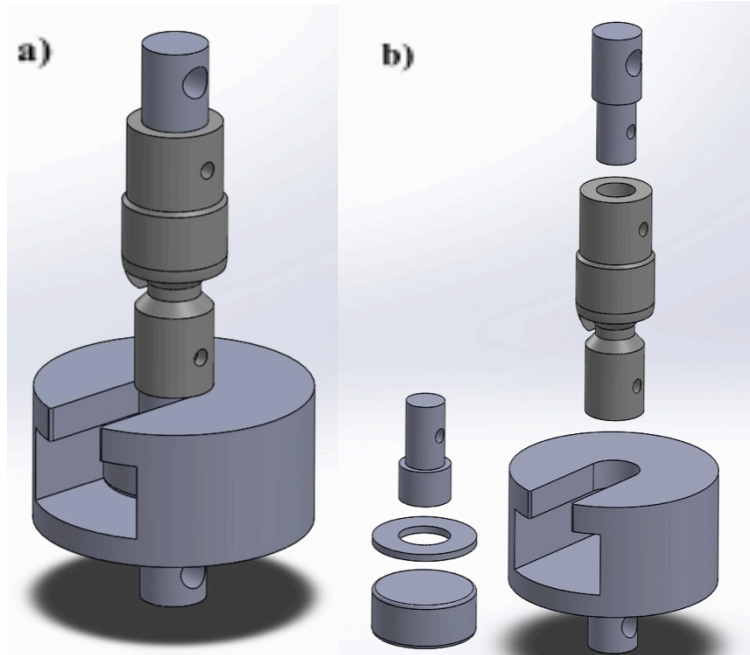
First fixture iteration full assembly A) Assembly containing all first-iteration fixture components. B) Exploded view of the fixture assembly, with sample setup on left and the fixture setup on the right. The ring provides even loading across the sample given the open slotted section.
